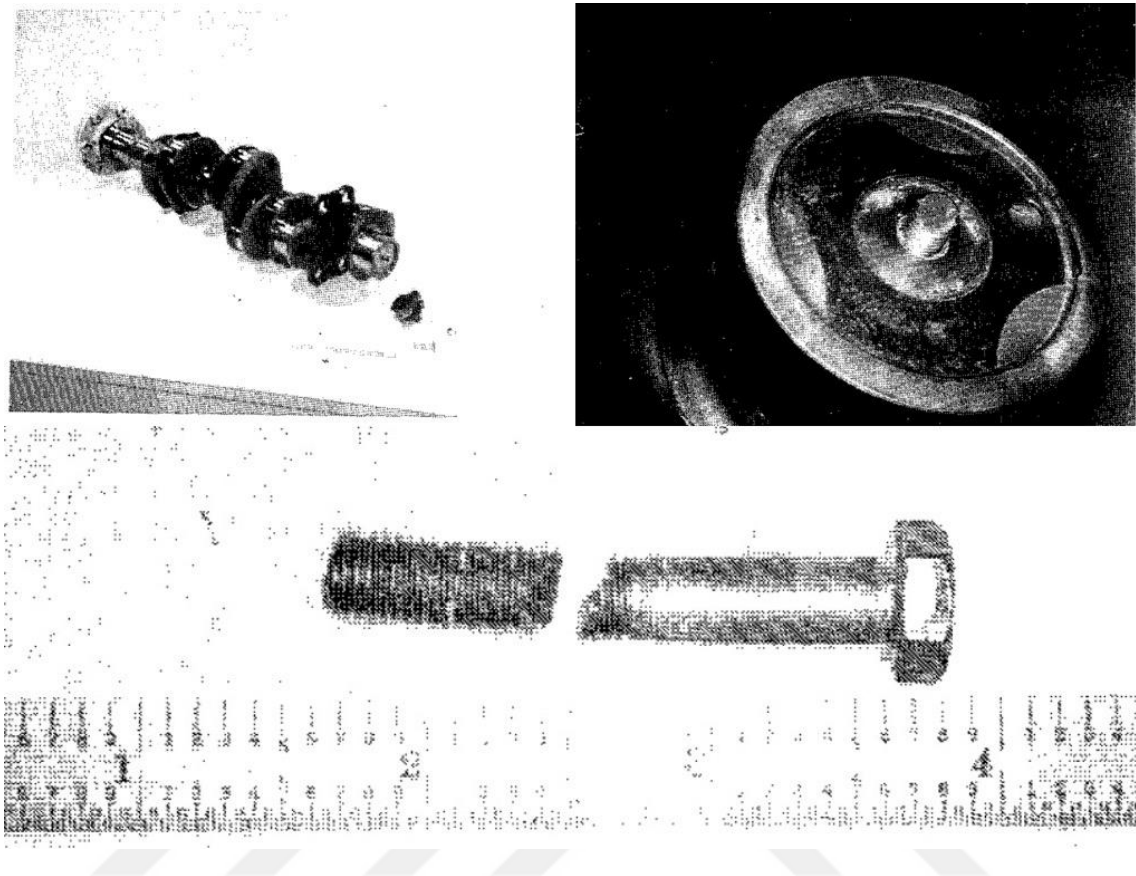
Image of the disassembled engine components, highlighting the fractured crankshaft gear bolt [213].
